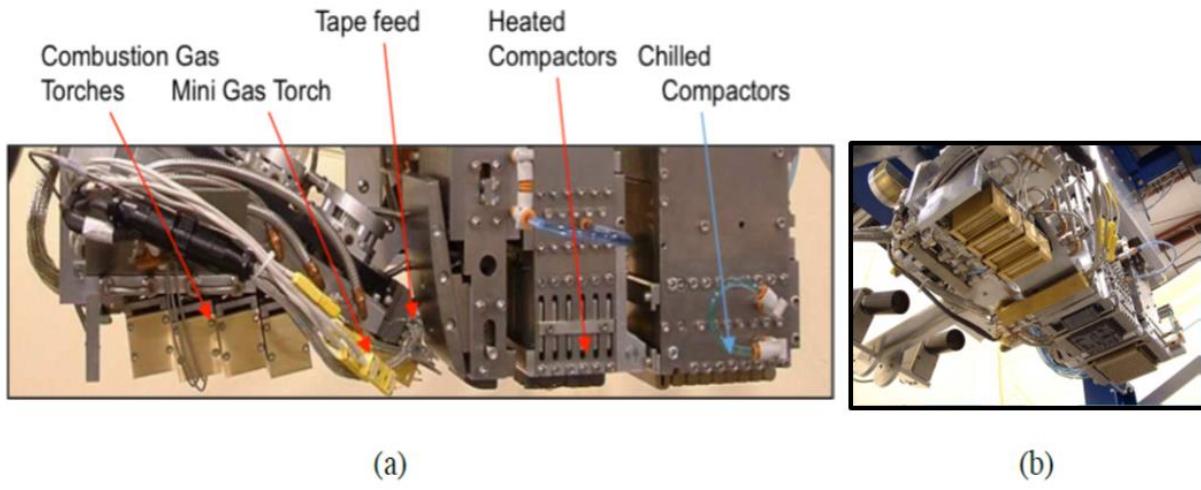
LaRC HH-ATP head process elements including front-view of torches, tape feeder mechanism, and three heated and chilled compactors (a) and bottom-view perspective (b).
